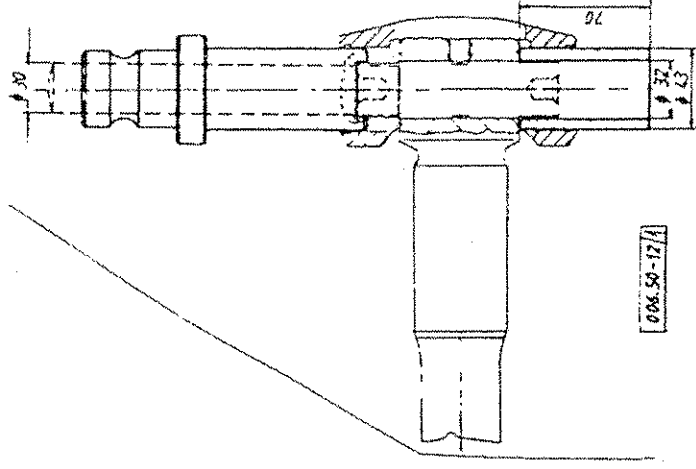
DRIVING OUT THE KNUCKLE PINS
